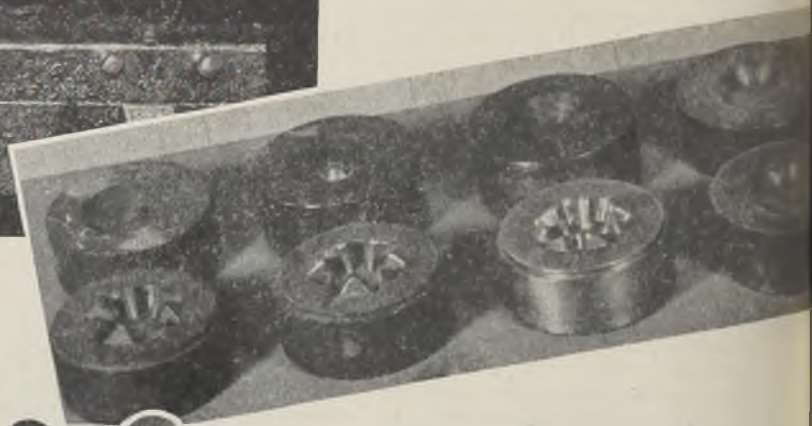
(Above)—Complete set of dies used in forging gears. Dies at extreme right upset bar stock slug. Second pair performs semi-forging operation and third and fourth pair the final forging operation
